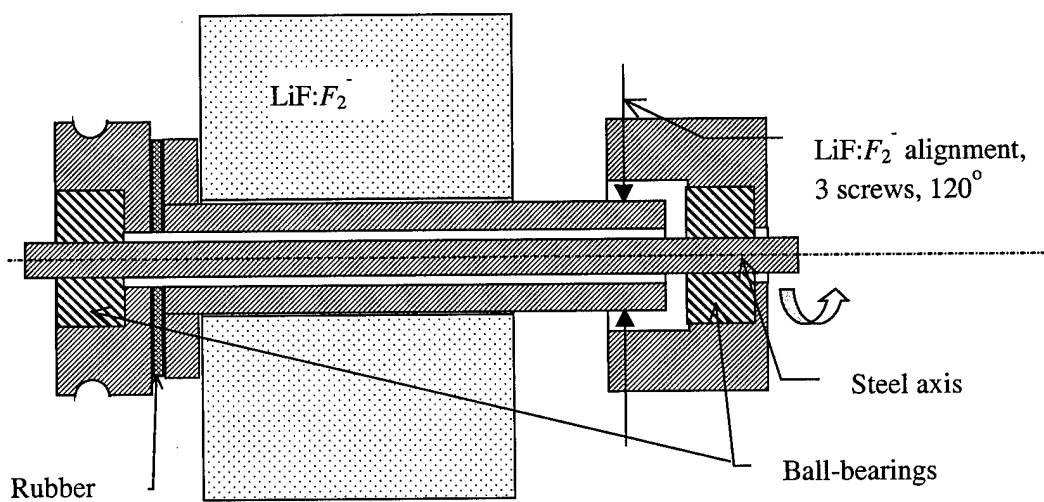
Layout of LiF rotation scheme. Steel axis is resting and all other parts are rotating in ball-bearings.
